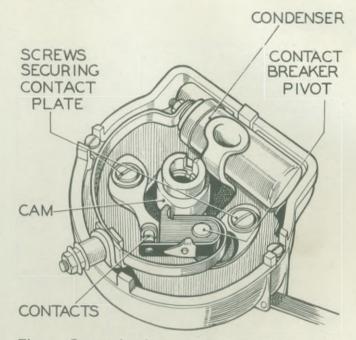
Contact breaker assembly. Distributor type DKY4A
